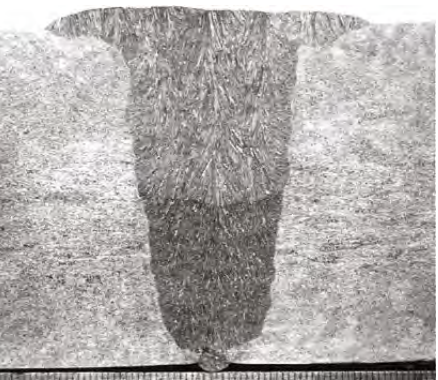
Macrograph of the Arctic 2205 sample welded by VRV (GTAW, SMAW, SAW) – 55 mm thick.
